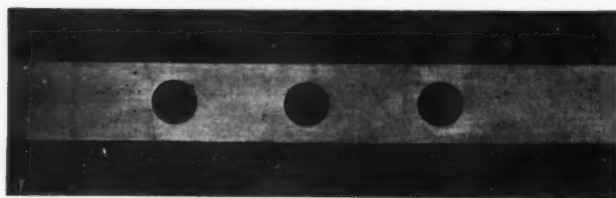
TEST SPECIMEN OF THREE PIECES OF BOILER PLATE WELDED TOGETHER AND THEN MACHINED TO SIZE
